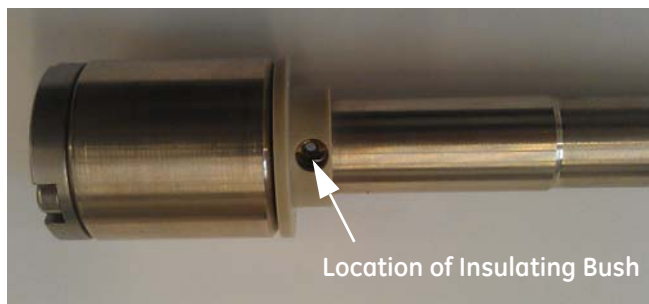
Insulating Bushes removed from the Mounting Feedthrough Spool
